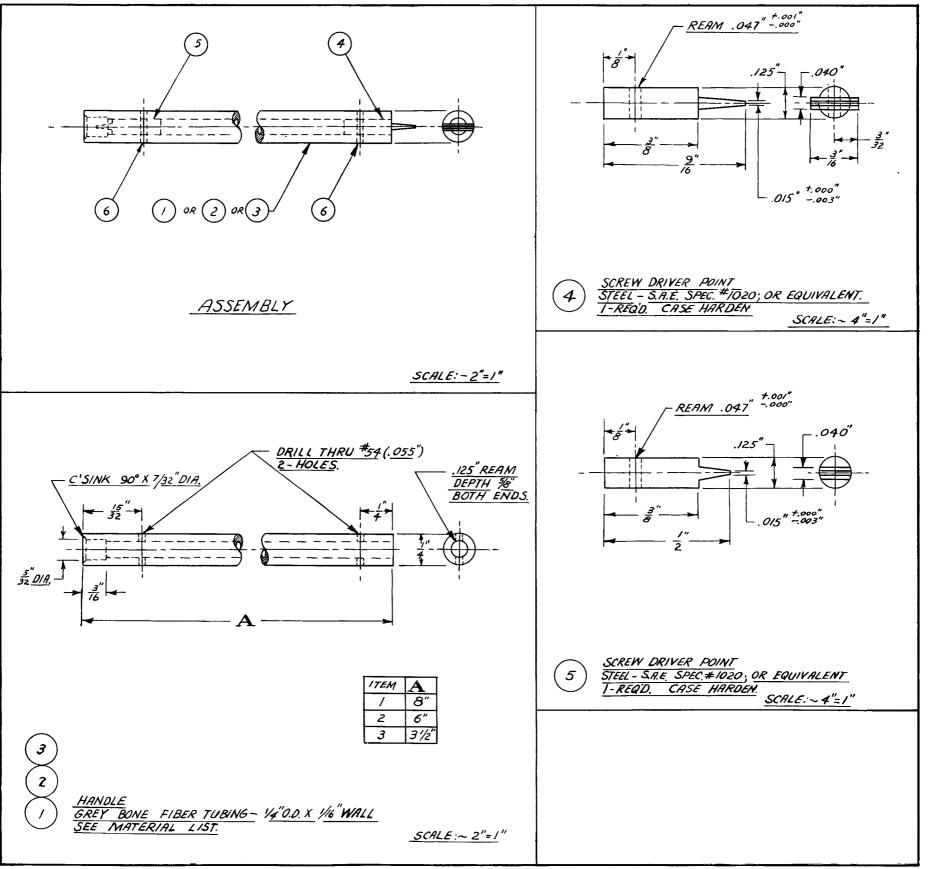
Radio Set SCR-718-(*) — Trimmer Adjusting Tools
